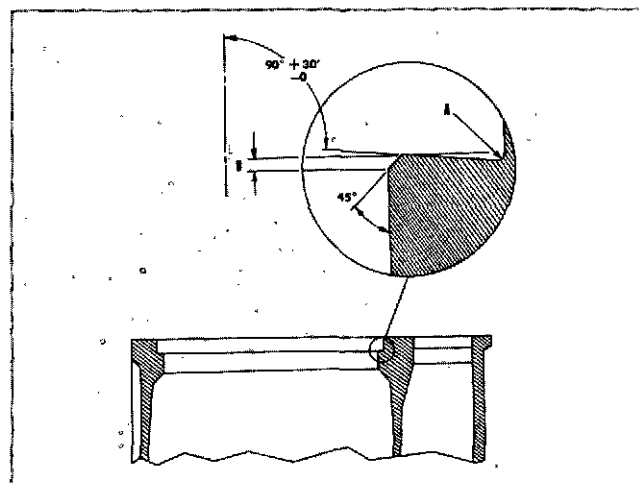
, N20147. Cylinder liner counterbore cross section
